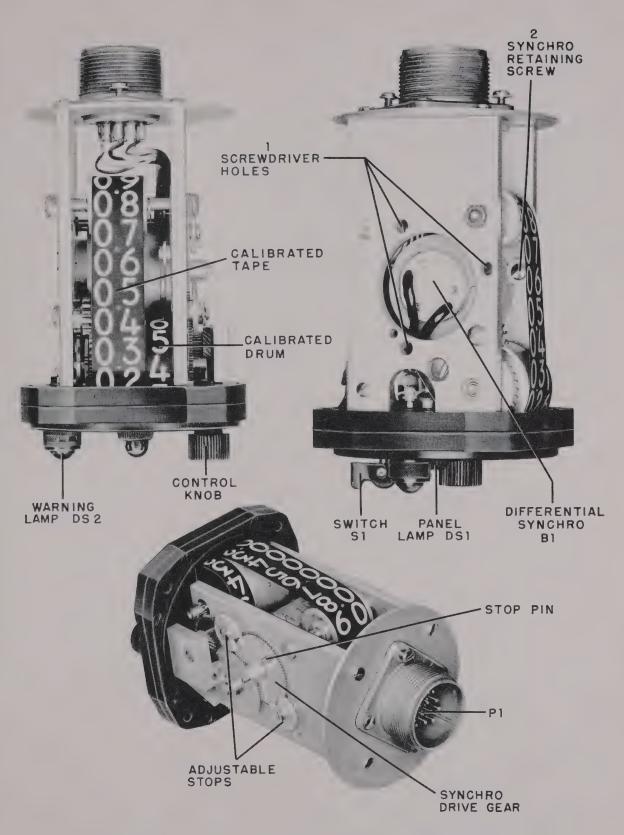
AZR-1A PPI Azimuth Rotator, Internal Views Showing Location and Identification of Parts
